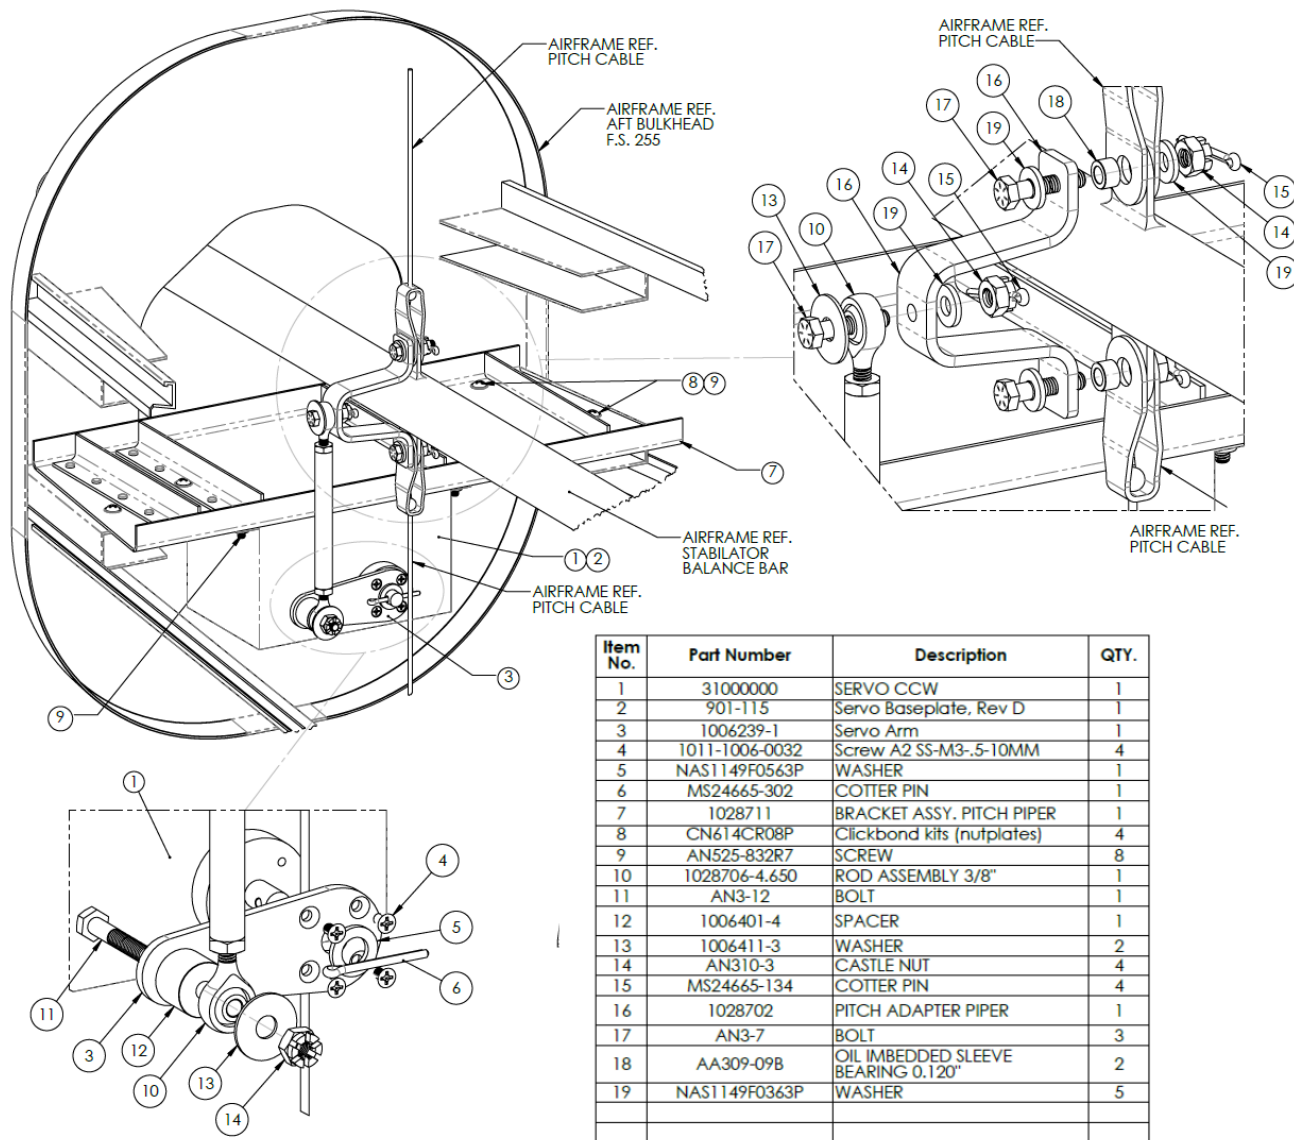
PITCH ASSEMBLY EXPLODED VIEW
